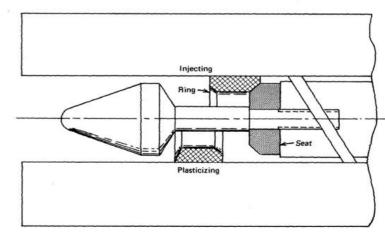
Ring type nonreturn valve for reciprocating screws.
